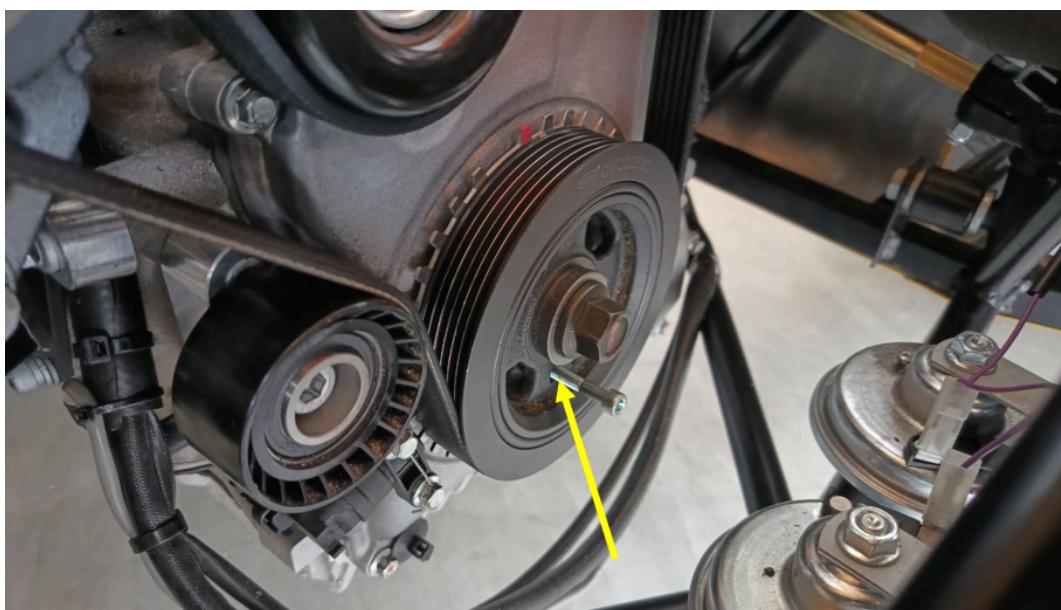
Use the marked hole for positioning the crankshaft pulley correctly to the crankshaft.
